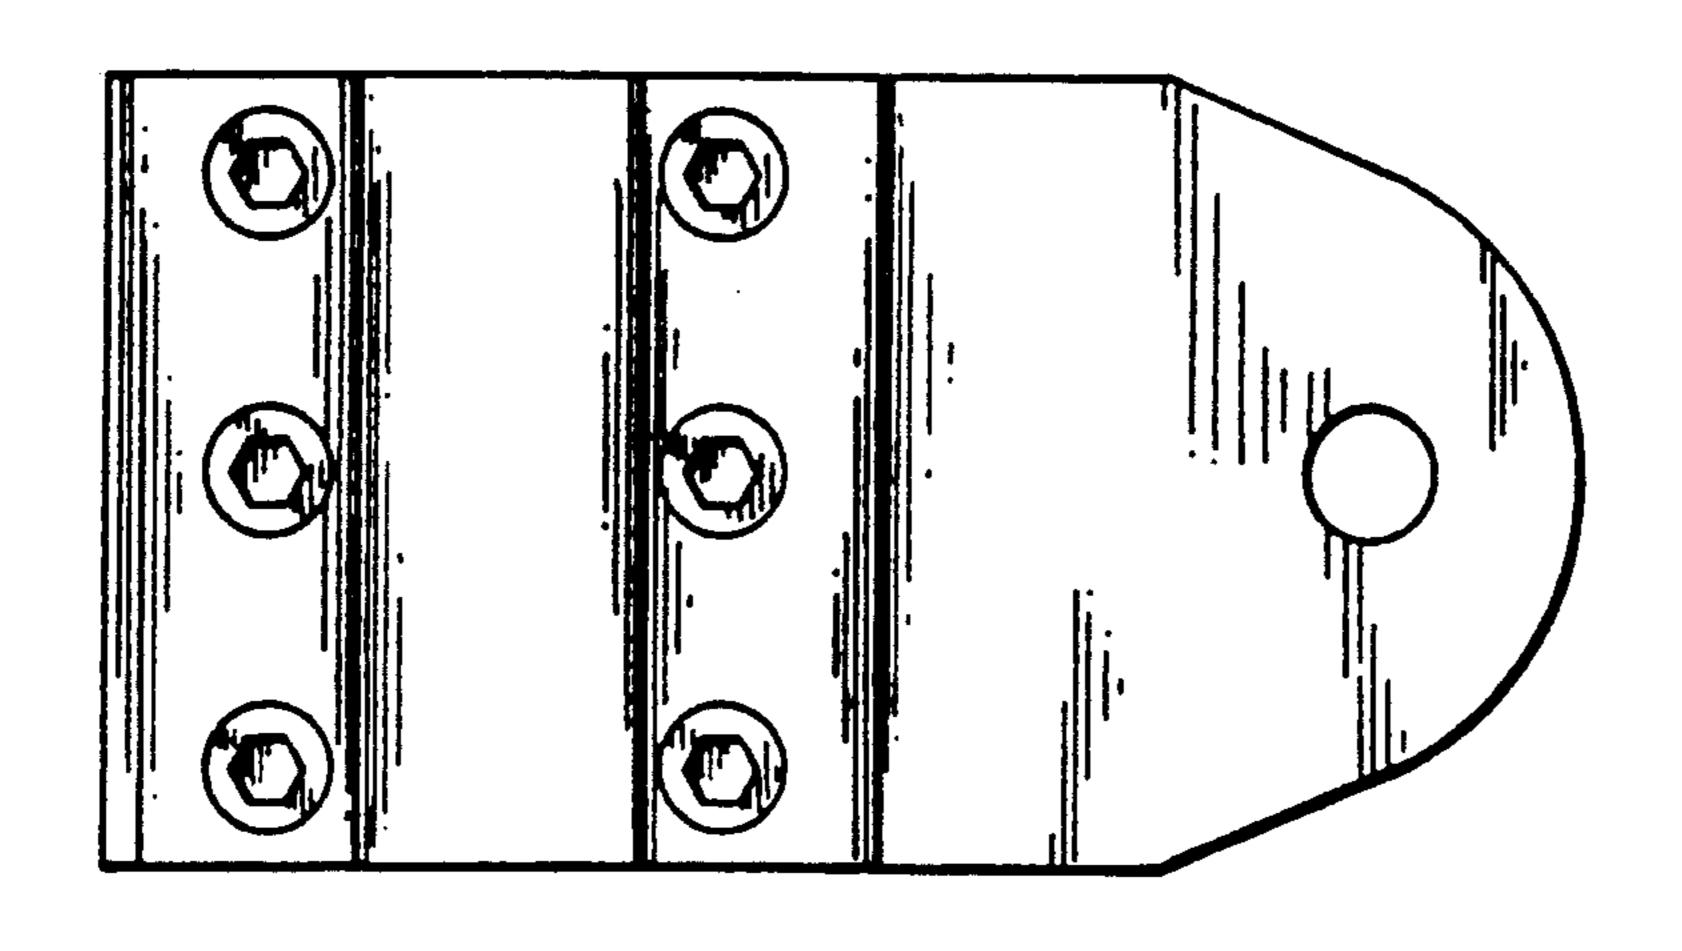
is a rear elevational view of the embodiment disclosed in FIG. 10;
